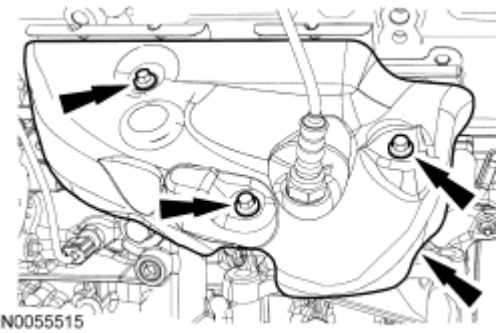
Locating LH Exhaust Manifold Heat Shield & Nuts
